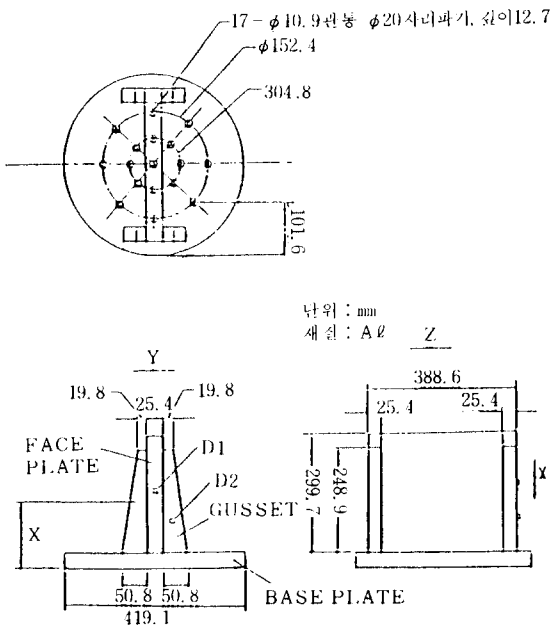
Dimension and Shape of Complex Shaped Fixture II
